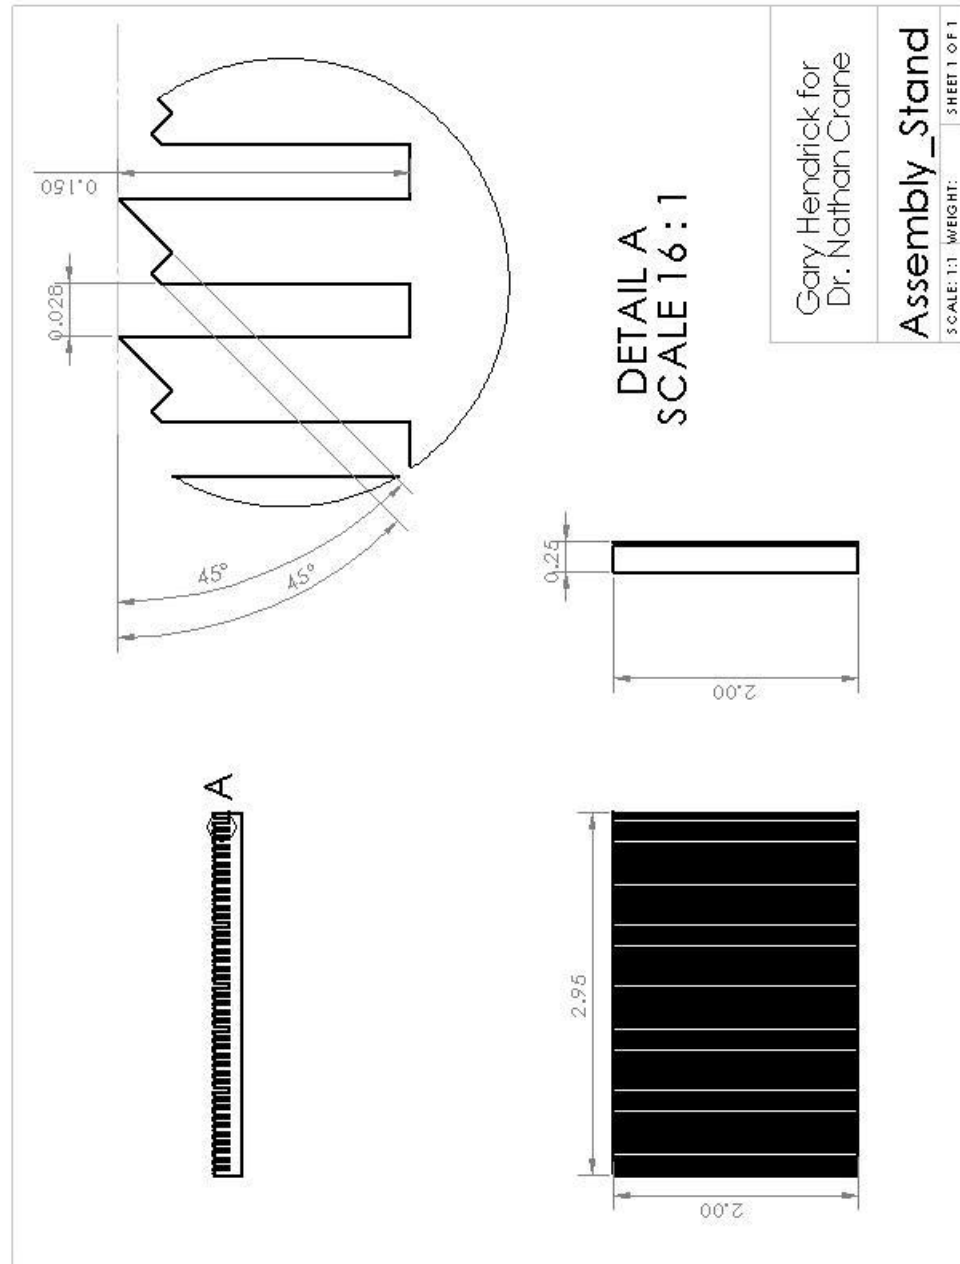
Original assembly mount design. The long milled shelves held assembly sites.
